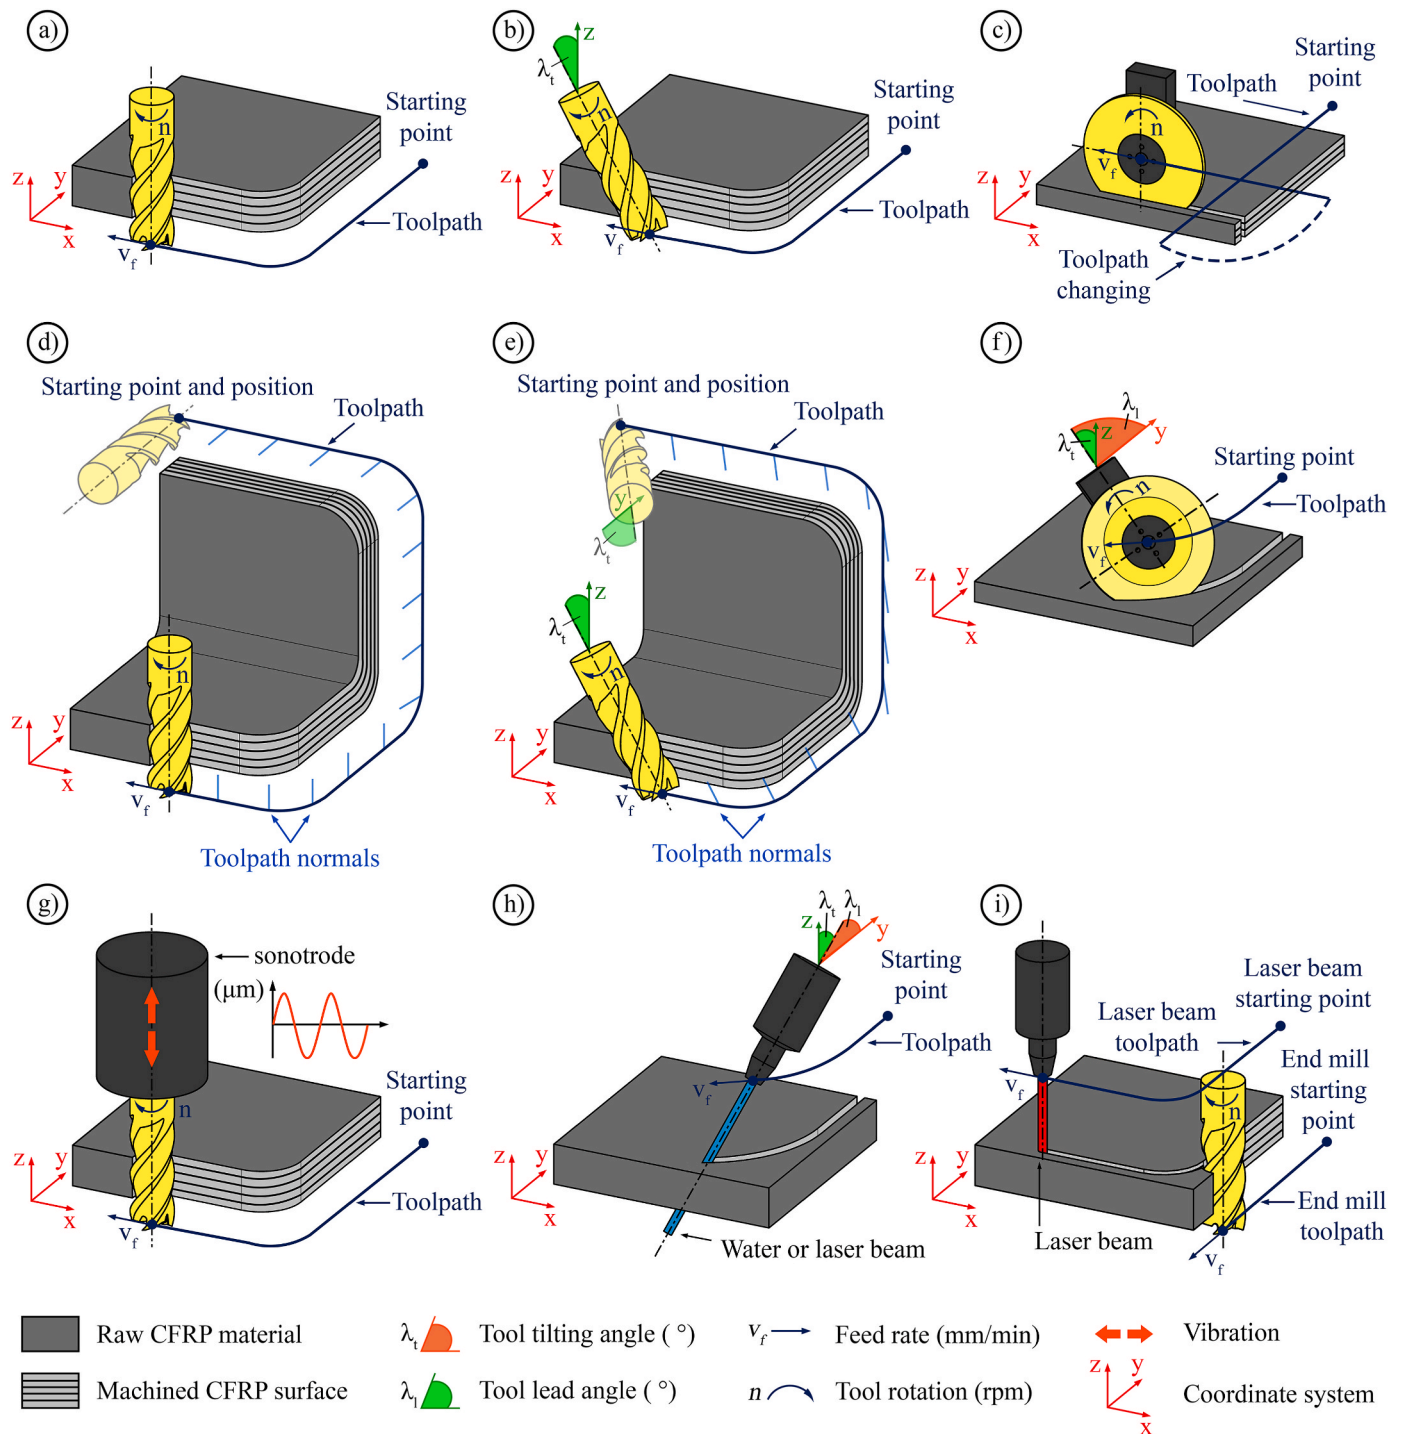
Schematic illustration of edge trimming technologies of CFRP workpieces focusing on tool movements: a) conventional mechanical edge trimming, b) tilted mechanical edge trimming, c) abrasive cutting with straight grinding wheels, d) 5-axis conventional mechanical edge trimming, e) 5-axis tilted mechanical edge trimming, f) curved circular cutting technology, g) ultrasonic vibration assisted edge trimming, h) laser beam cutting or abrasive water jet cutting, i) laser scored edge trimming.
